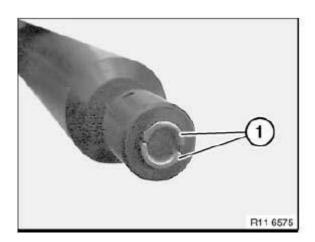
Pressing Valve Key Into Special Tool (11 9 953) Courtesy of BMW OF NORTH AMERICA, INC.
